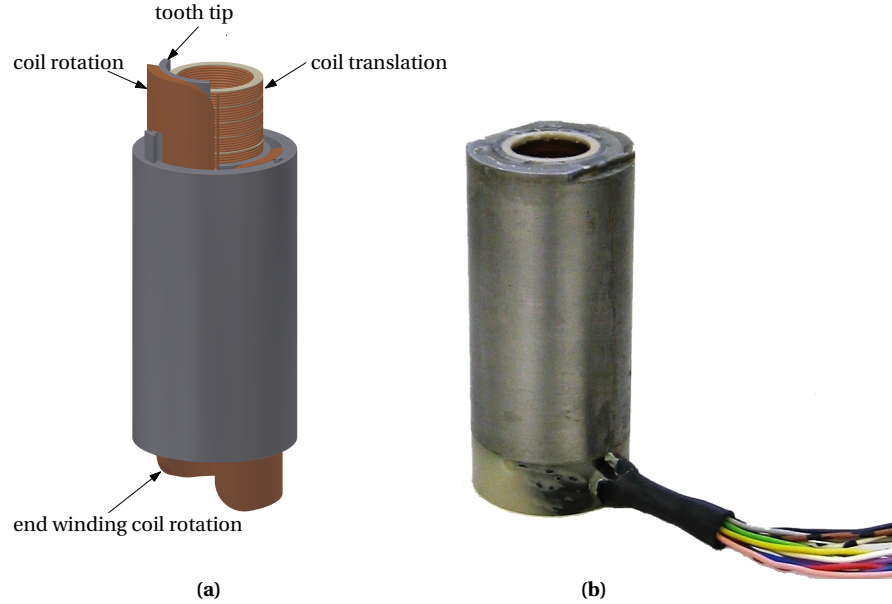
Stator section consisting of stator-back-iron and windings for rotation and translation. (a) Illustration to clarify the assembly of the stator section. (b) Picture of realized stator section.
